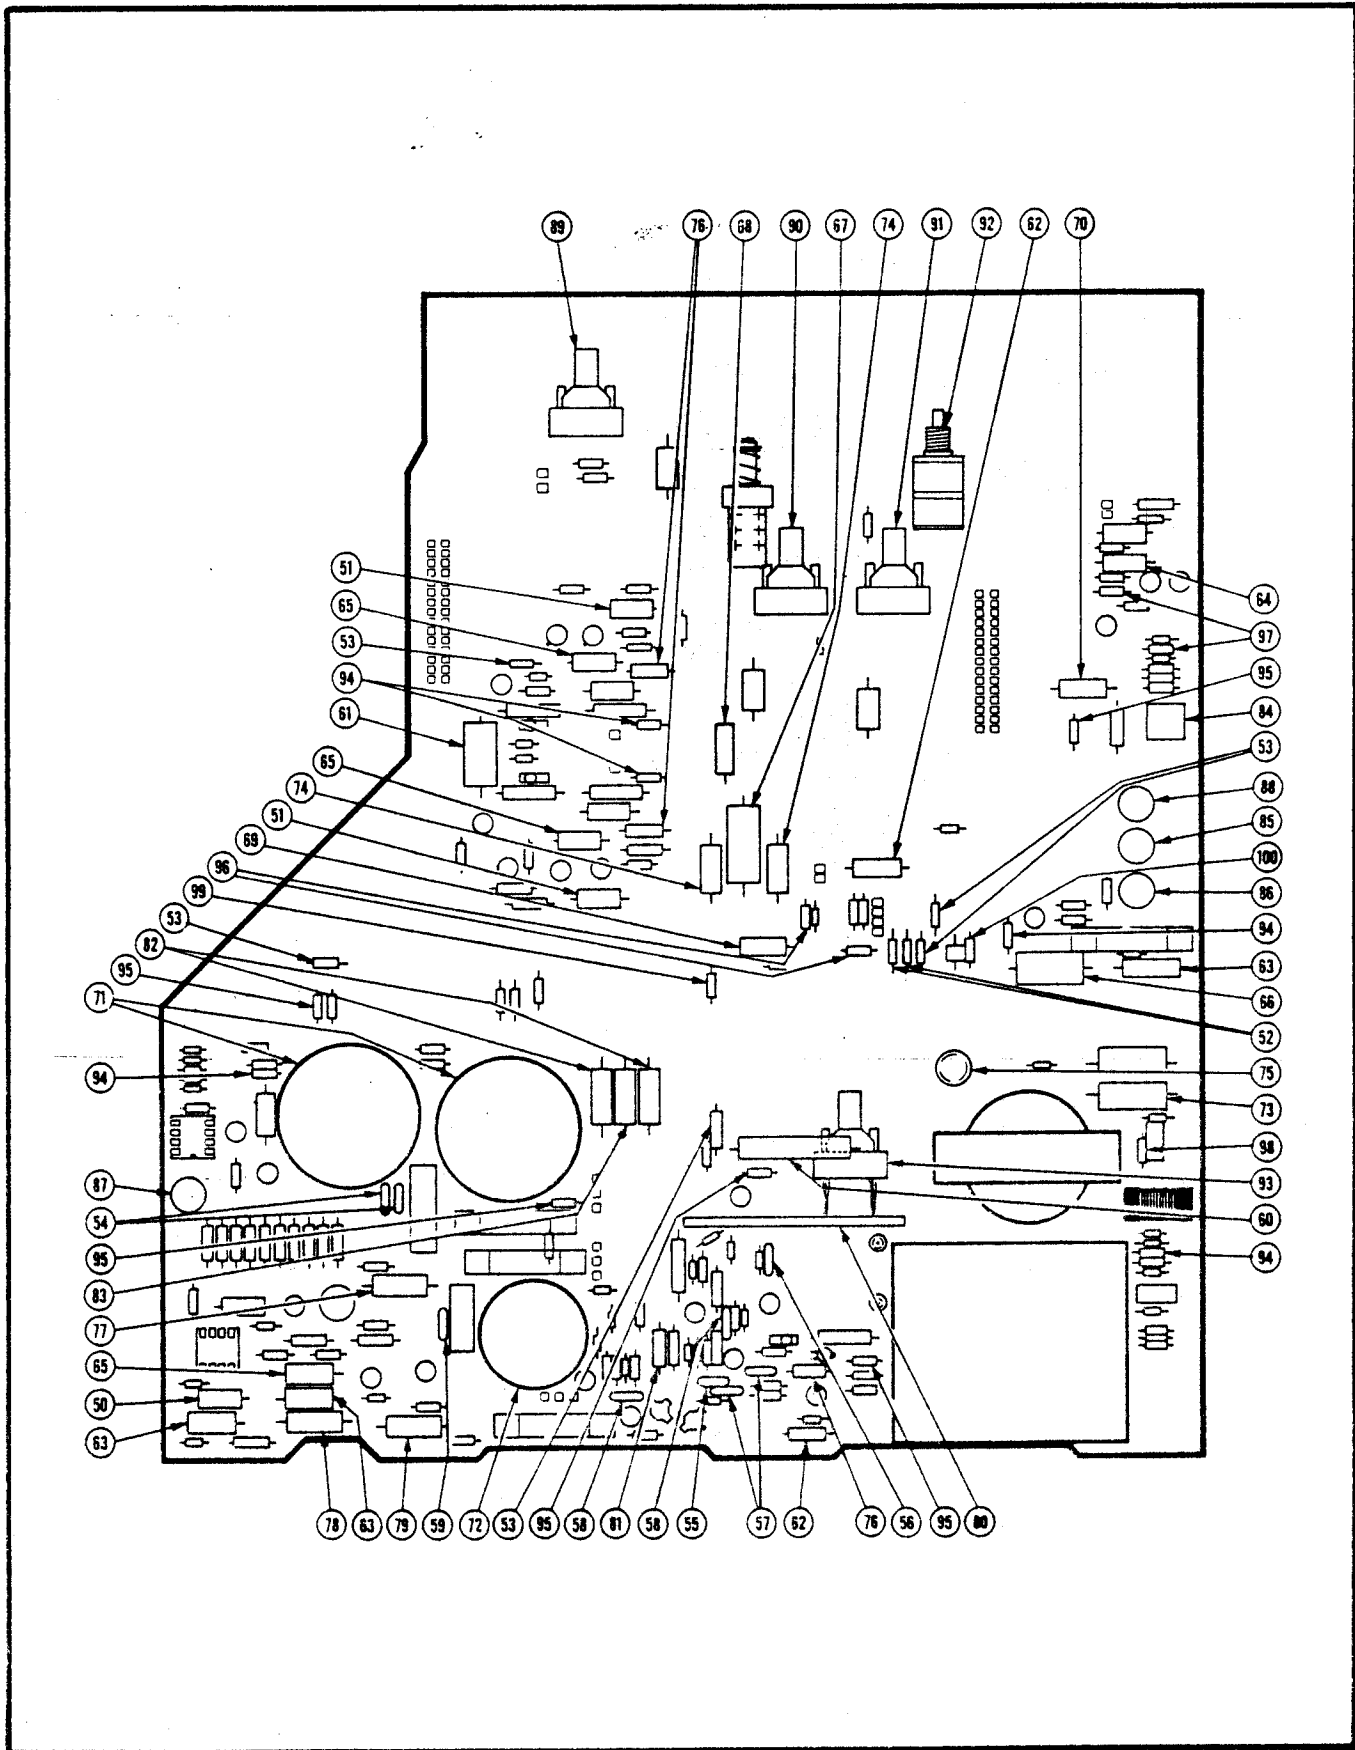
A11 Circuit Board Assembly, Interface (sheet 2 of 4).
